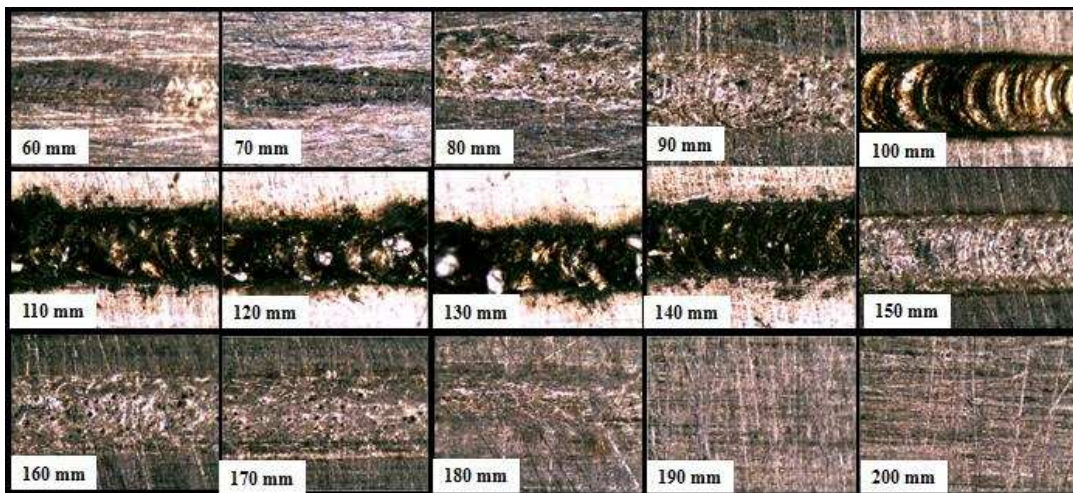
Weld line produced on sample surface (PW) (10x magnification).
